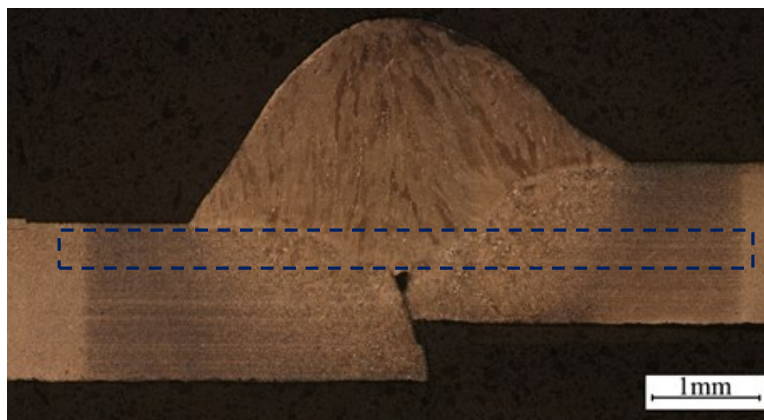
CMT welding of butt joint, $V=17$ mm/s
